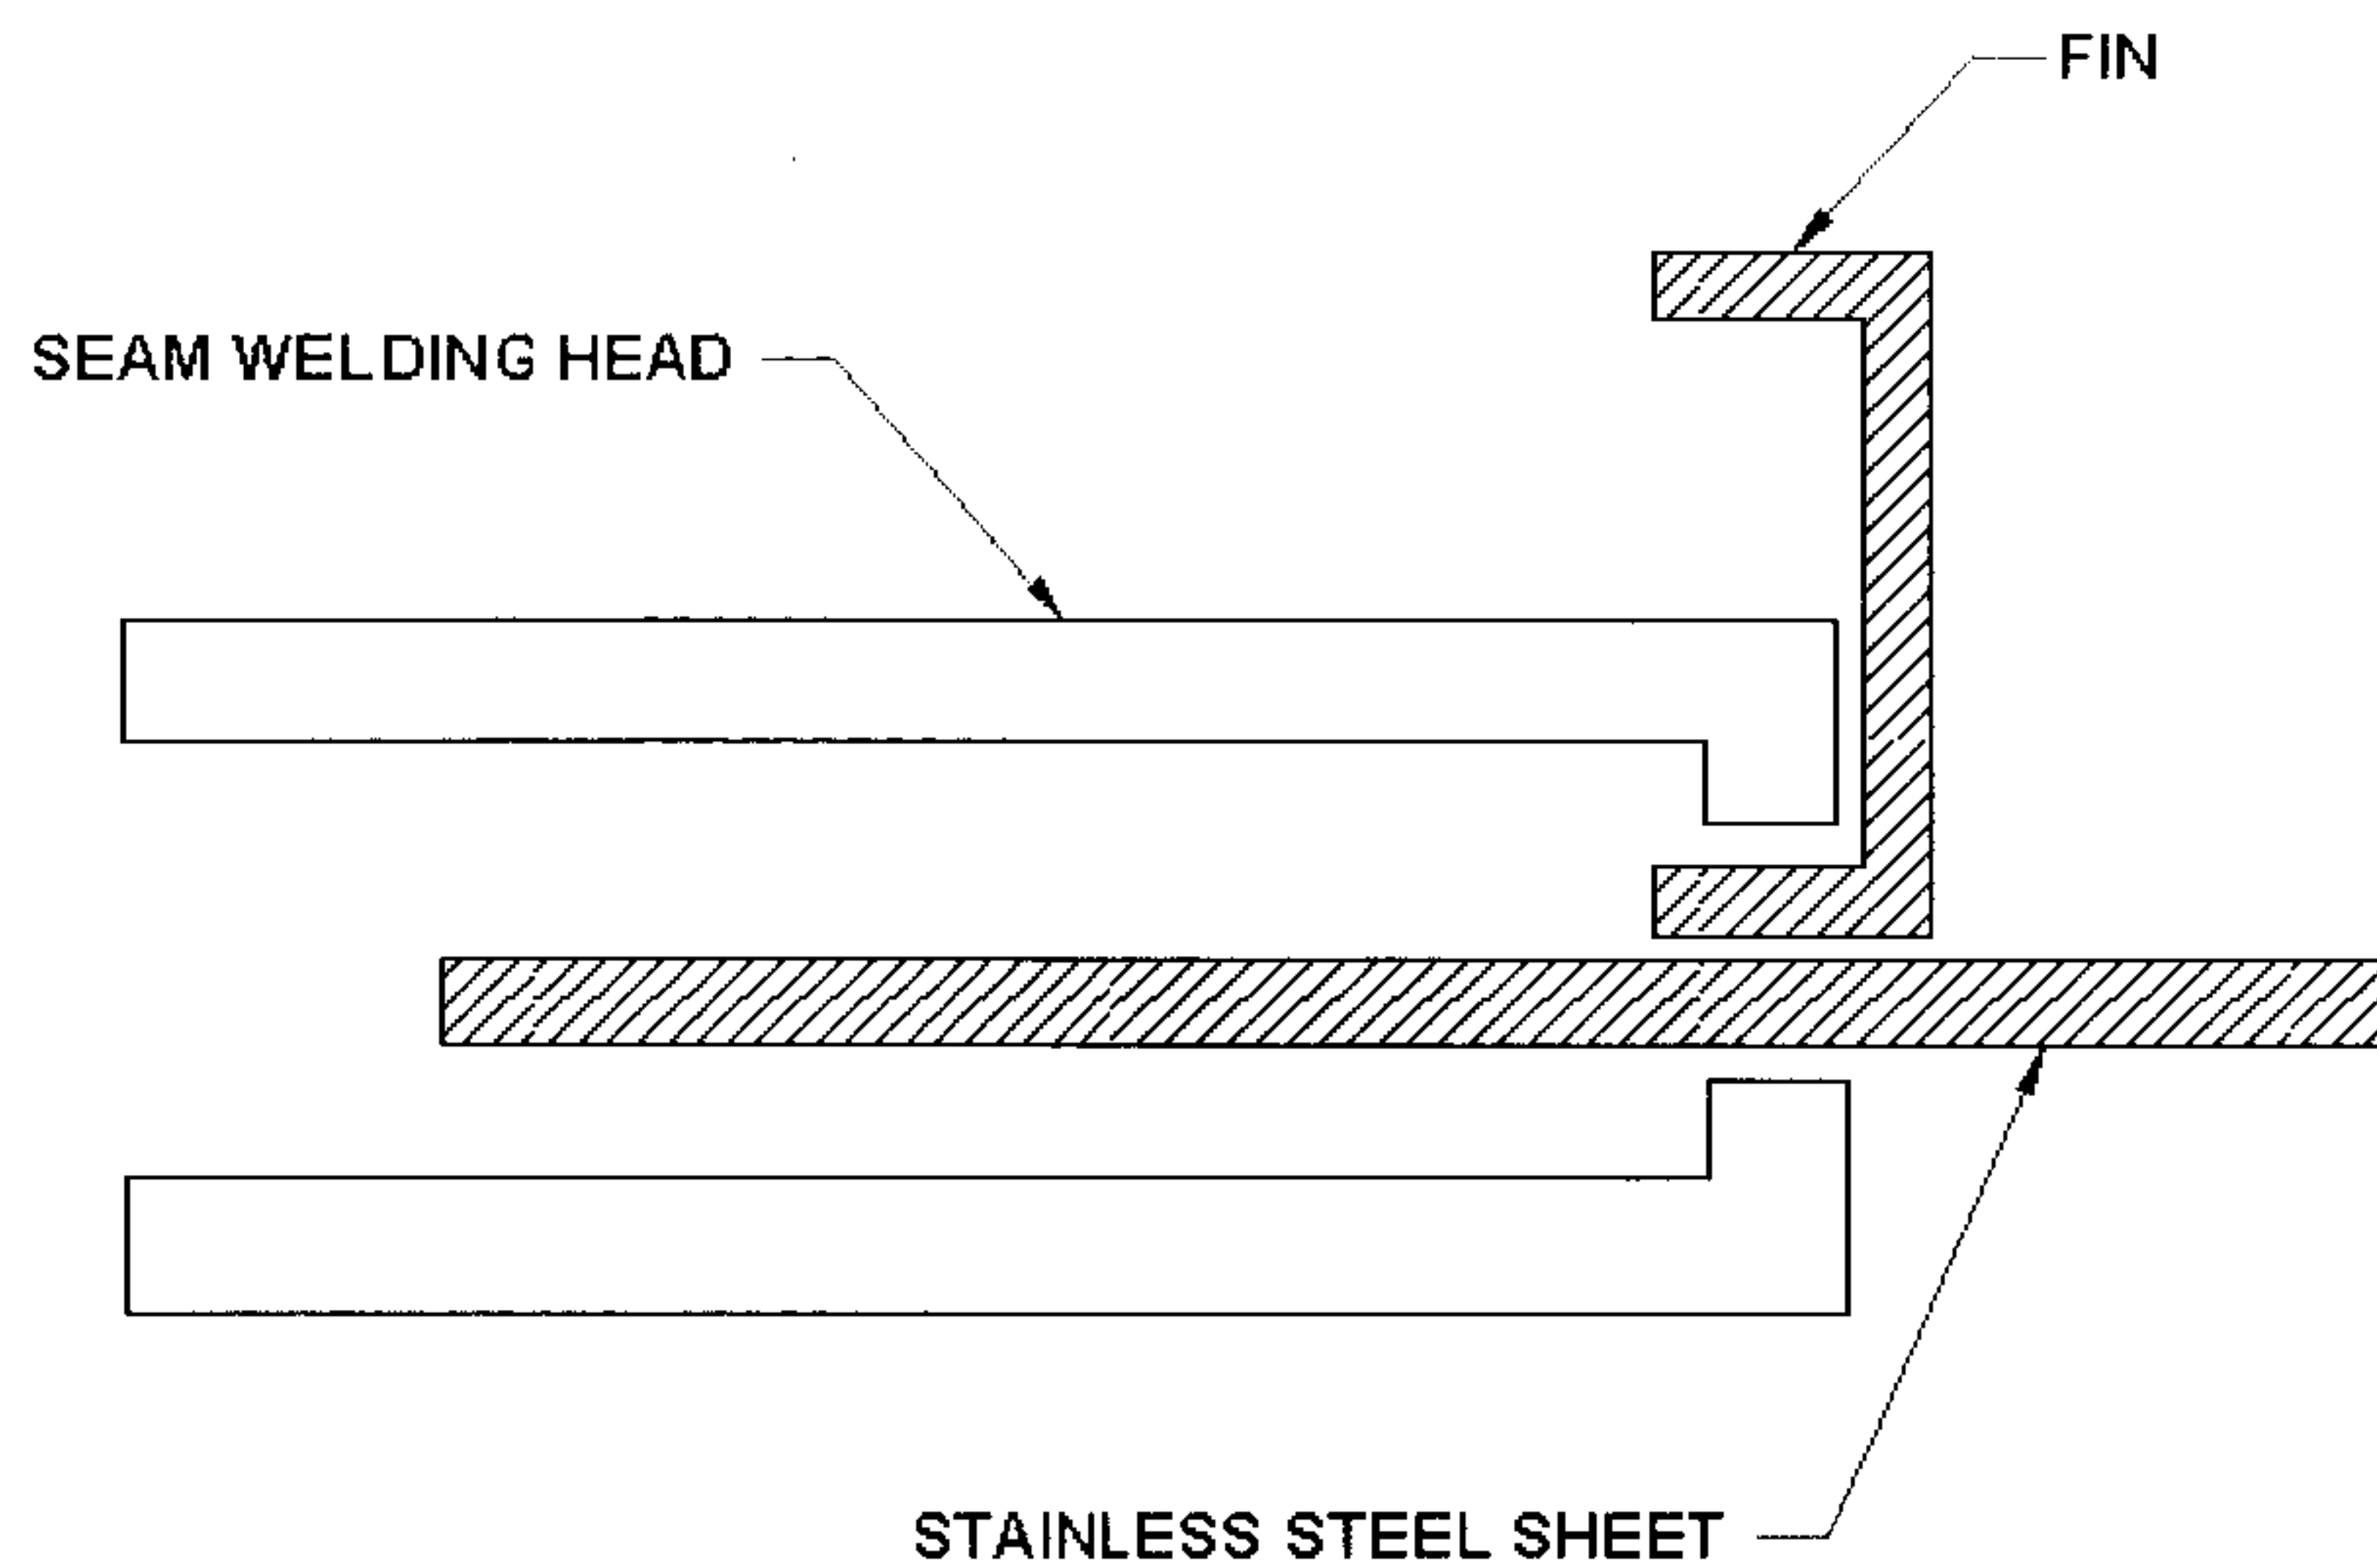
The use of *seam welding* for attaching the fins to the base metal sheet
